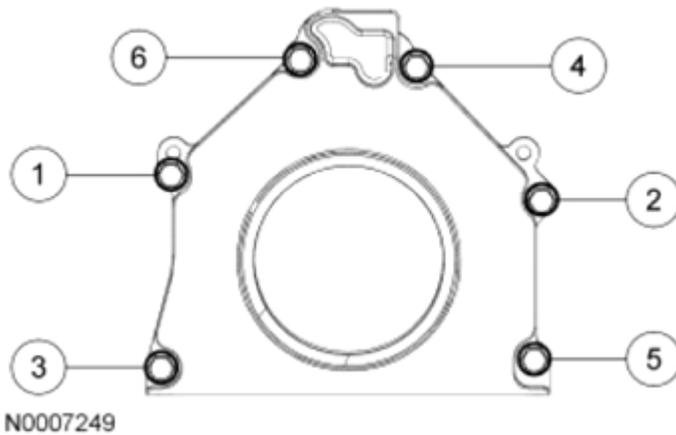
Identifying Retainer Plate Bolts Tightening Sequence
